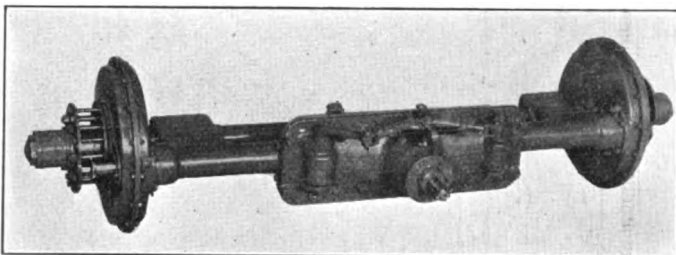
A 1-TON INTERNAL-GEAR AXLE HAVING A SOLID STEEL CARRYING MEMBER WITH THE DRIVING MECHANISM IN FRONT
